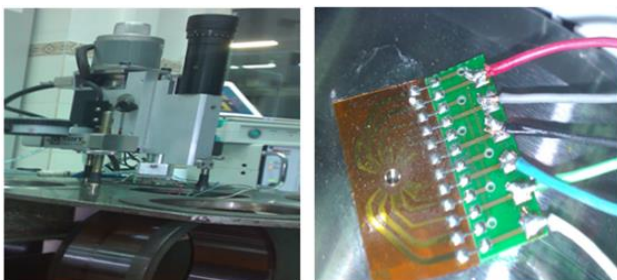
Ring bearing assembly - MTS 3000 equipment
